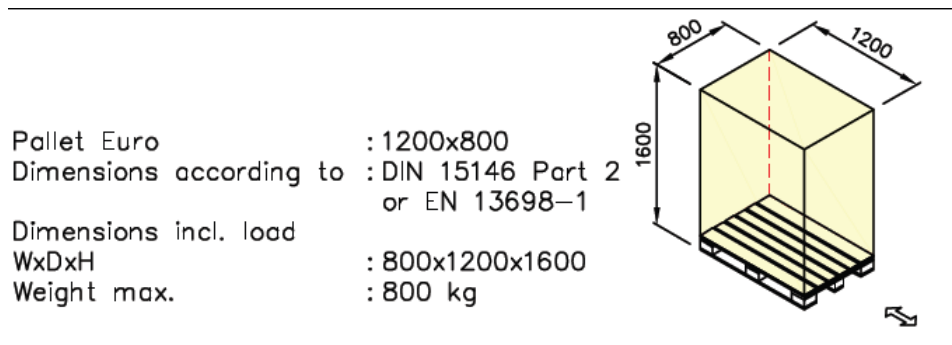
Dimensions and weight of a typical Euro-pallet
